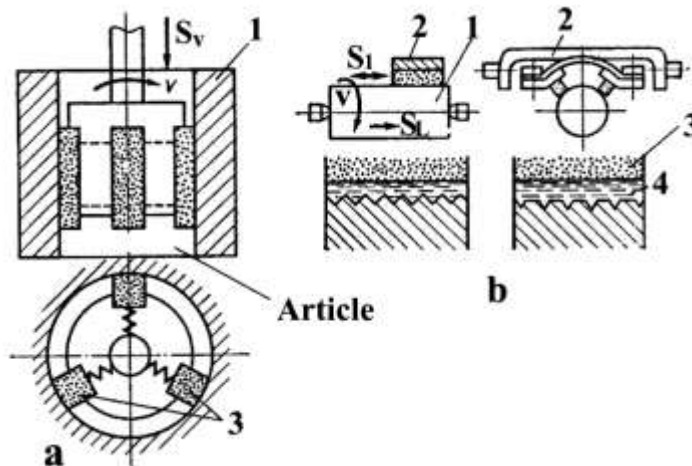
Finishing methods of machining: a – honing; b – superfinish;
